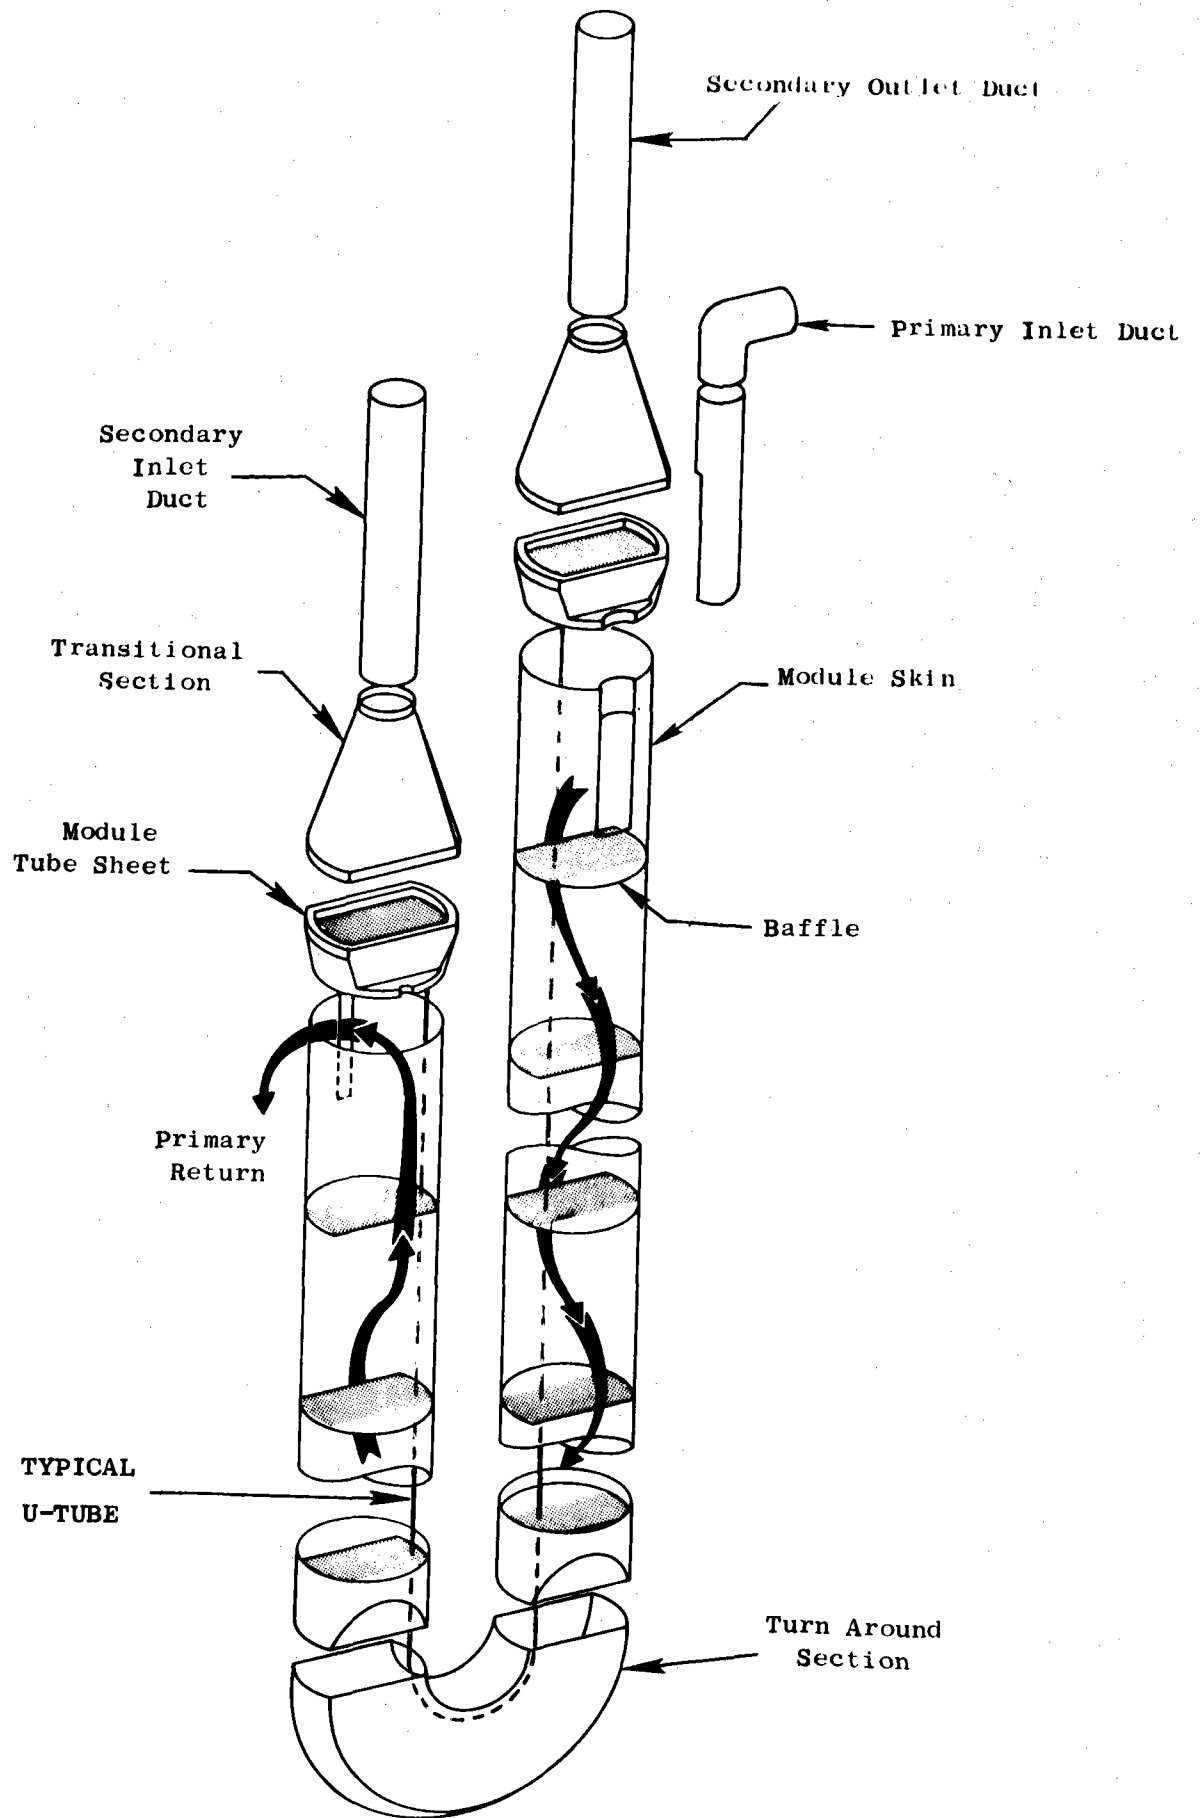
Exploded Parts View of U-tube IHX Module (Reference Design)
